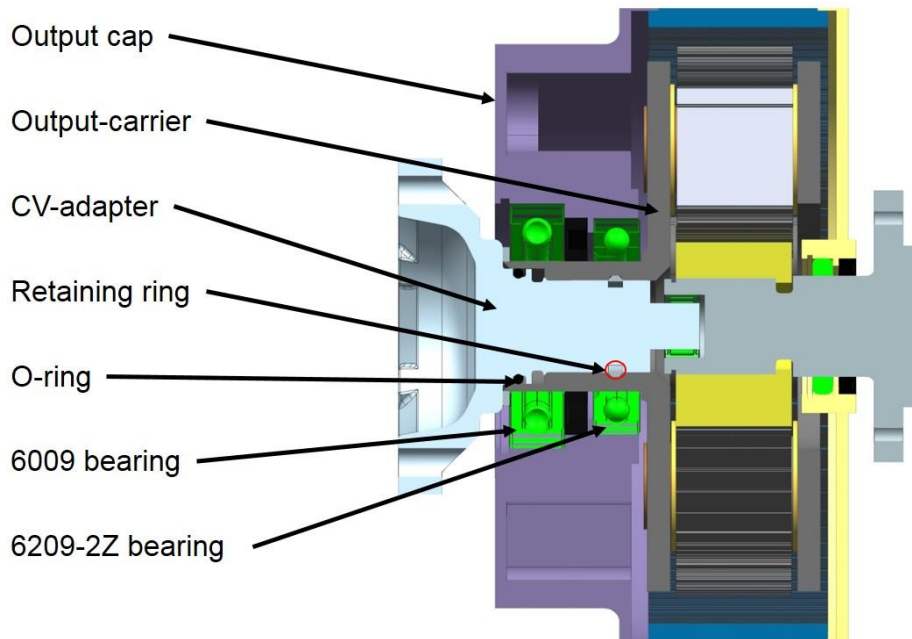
Gearbox parts affected by a possible redesign lowering the stress on the CV-adapter part
